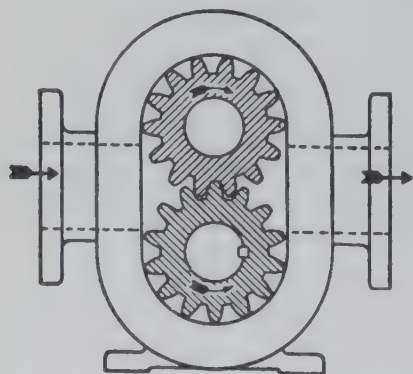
Cross-sectional drawing of external gear pump. (Hydraulic Institute.)
